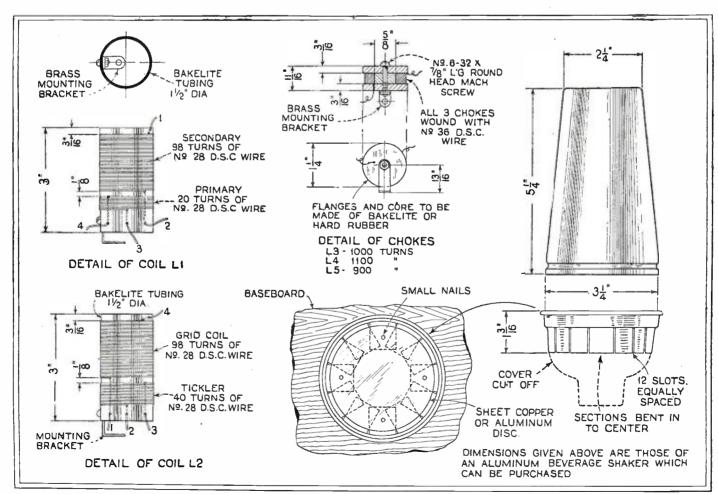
The above drawing gives complete directions for constructing the homemade parts used in the "Milk-Shaker Special" receiver. The two coils and the R.F. choke coils are of very simple construc-
